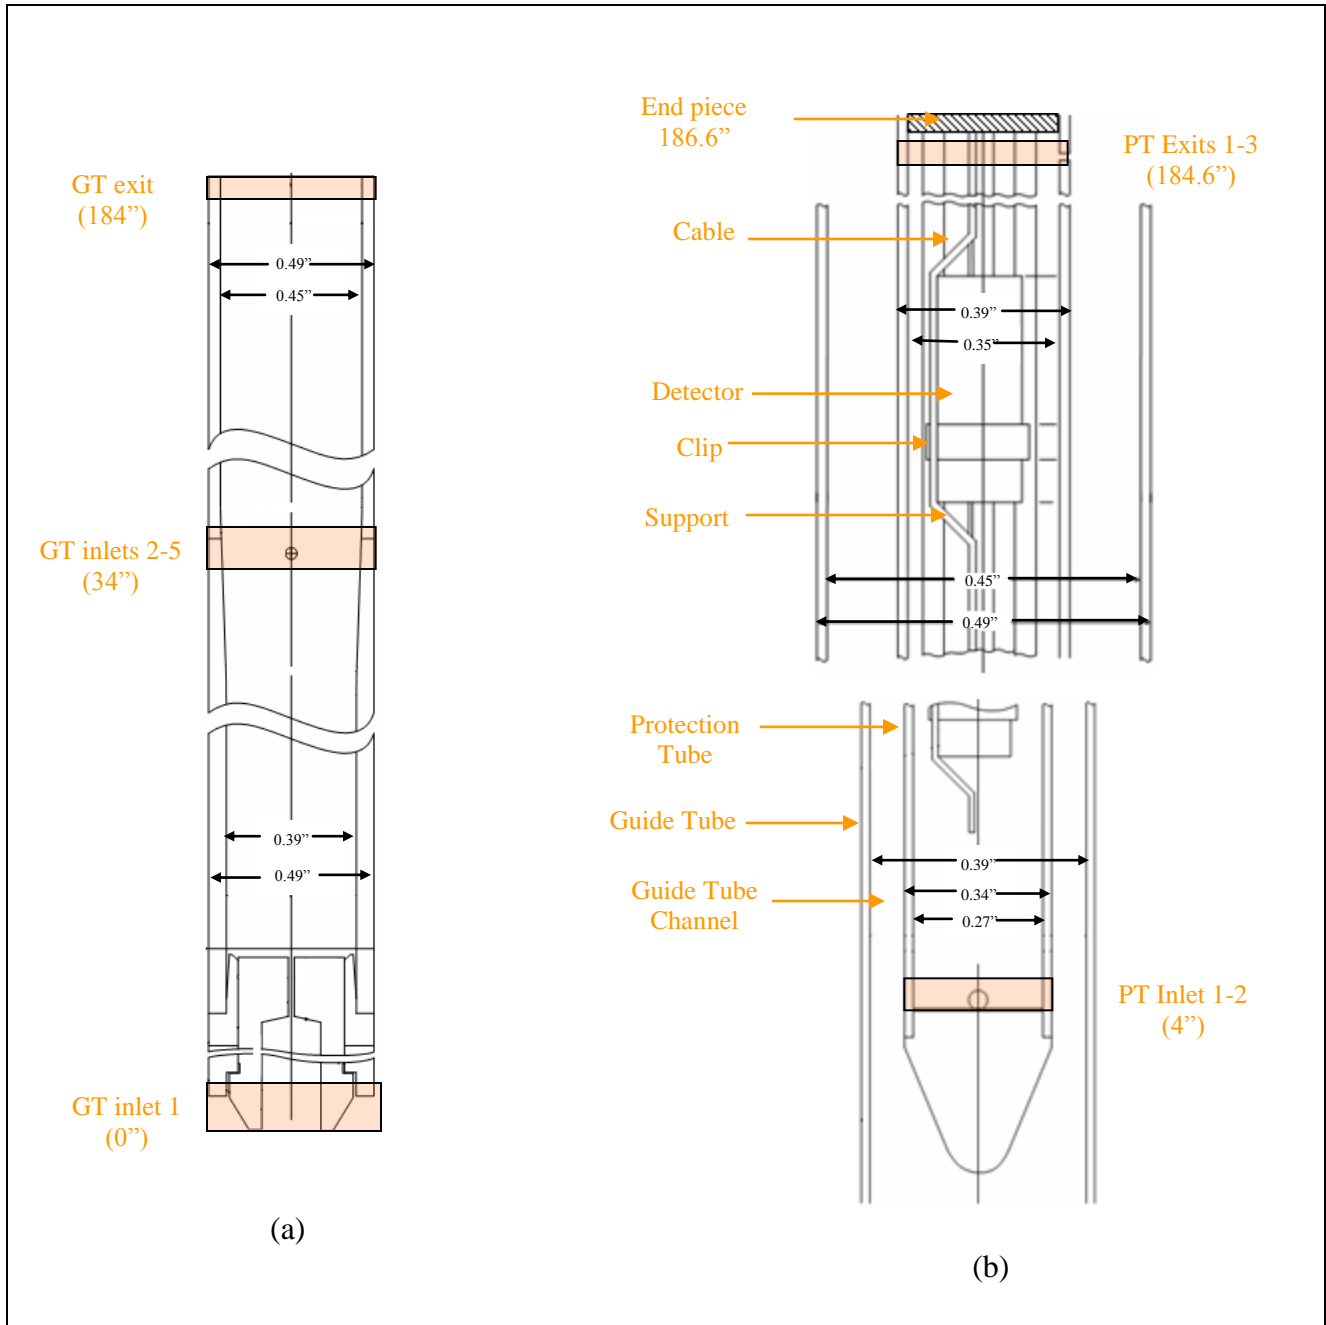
a) Guide Tube; b) Guide Tube inserted with Protection Tube and Detectors
